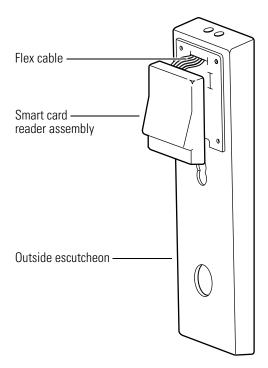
Removing the B.A.S.I.S. smart card reader assembly from the outside escutcheon
